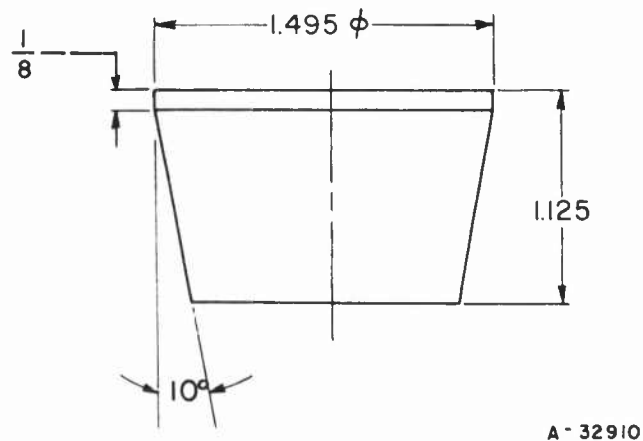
DIMENSIONS OF BILLETS USED IN INVESTIGATION OF TAPER ANGLE, USING HEMISPHERICAL PUNCH TIP
